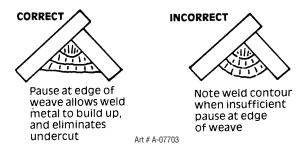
Examples of Vertical Fillet Welds
